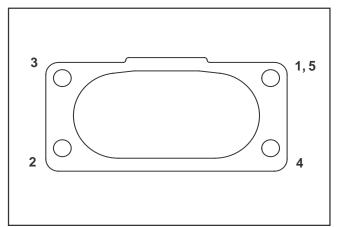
Torque Sequence for Air Cleaner Mounting Nuts.
